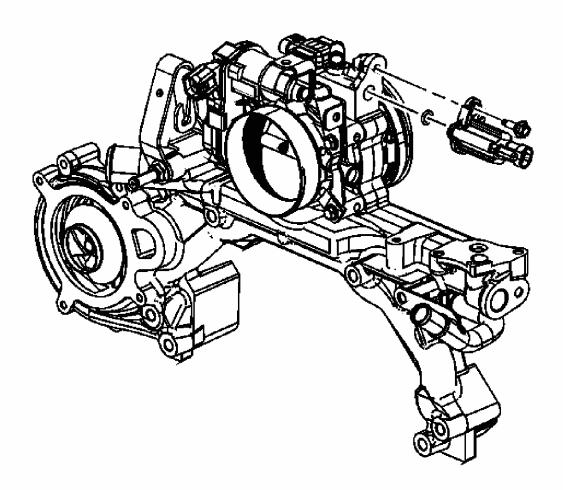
View Of EVAP Canister Purge Solenoid Valve & Bolt Courtesy of GENERAL MOTORS CORP.
